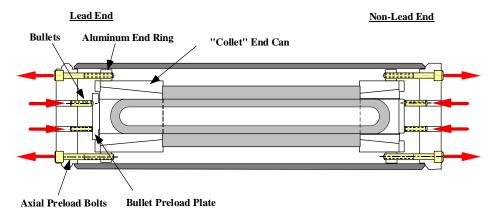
Axial Support of the Cold Mass Assembly
